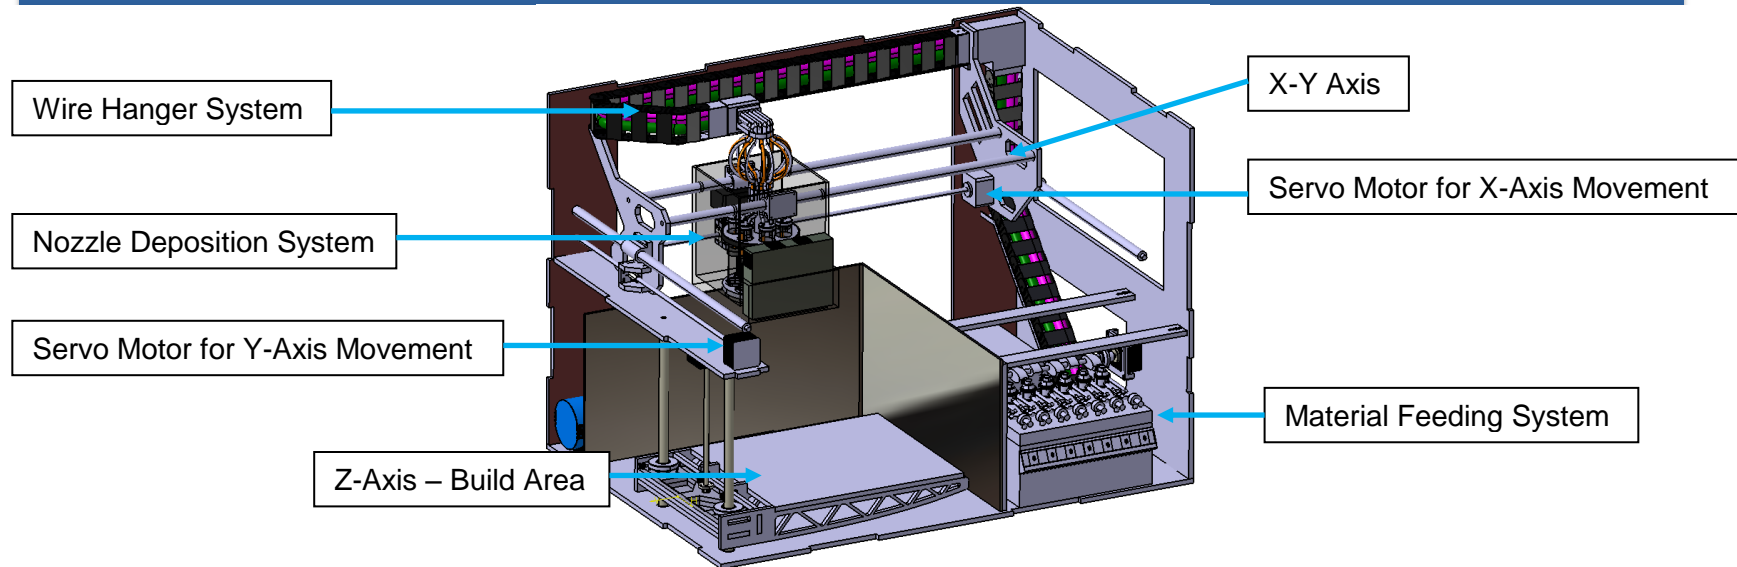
M²-3D Printer Machine Design Layout – Isometric View
